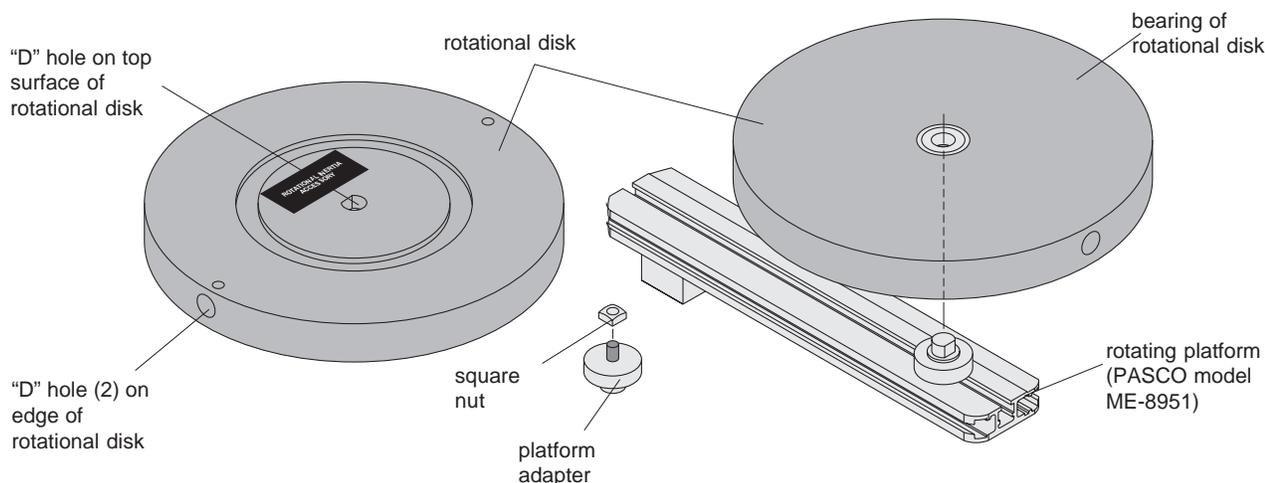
Rotational Inertia Accessory Including Platform Adapter Assembly
